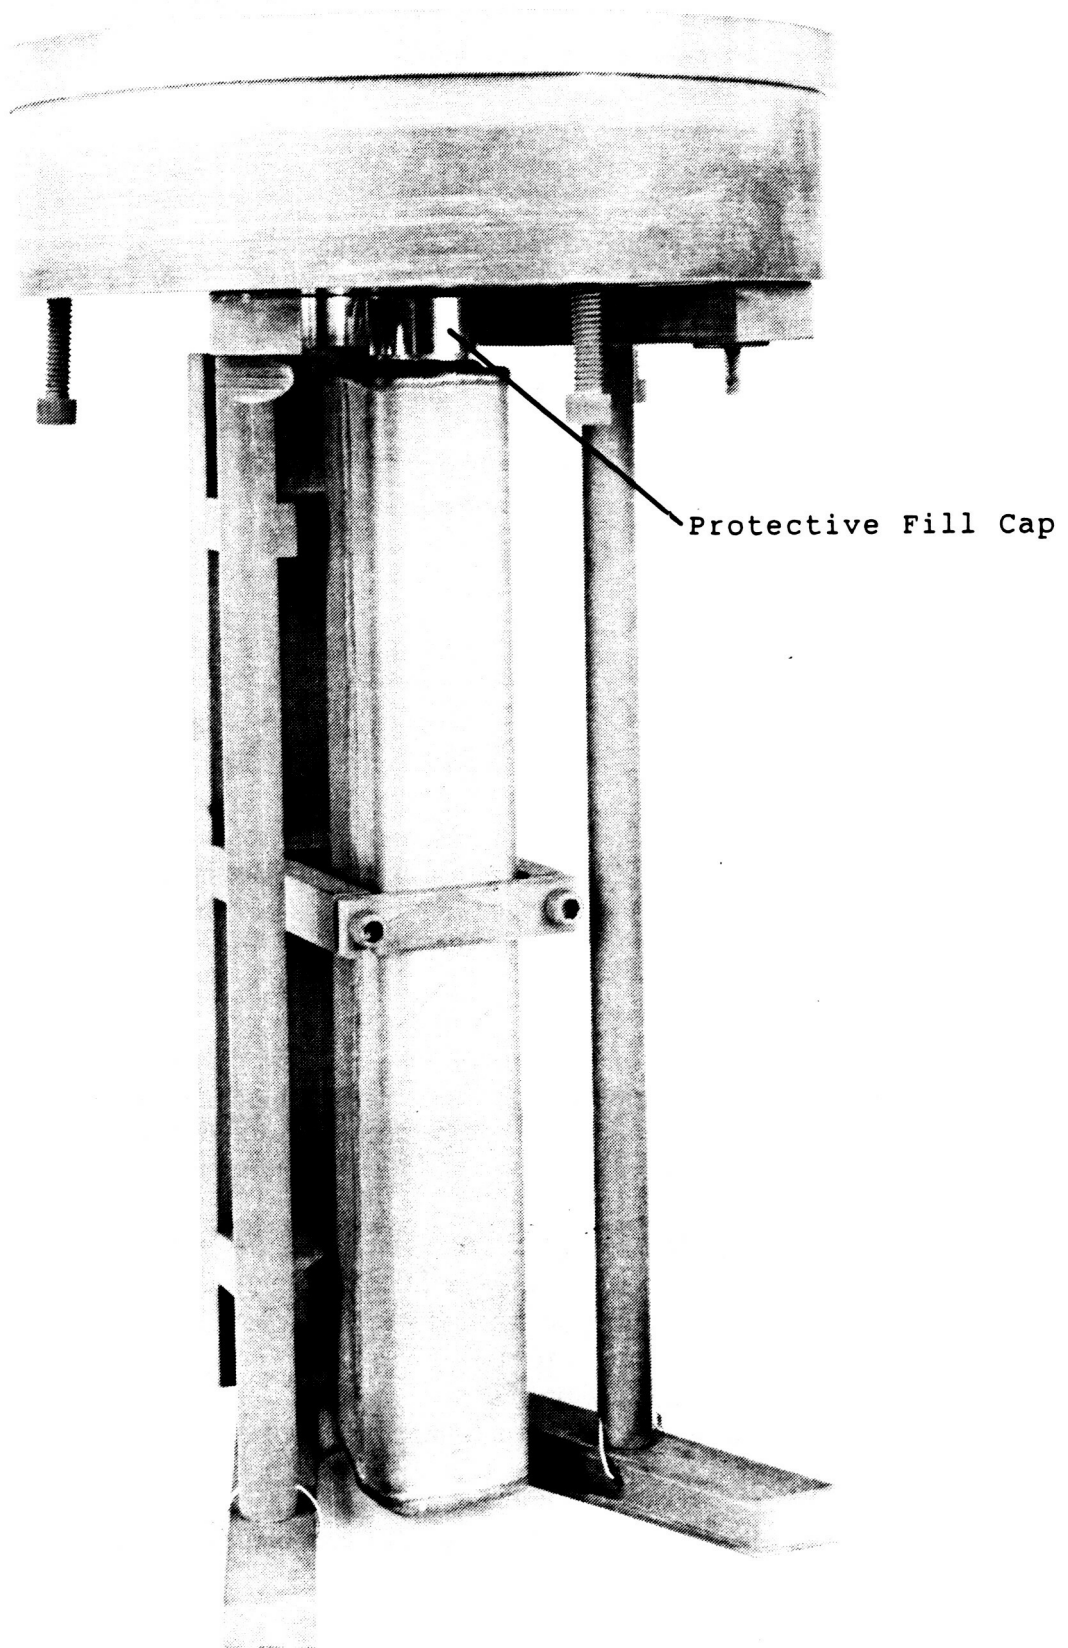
CANISTER SECURED IN FILLING FIXTURE
